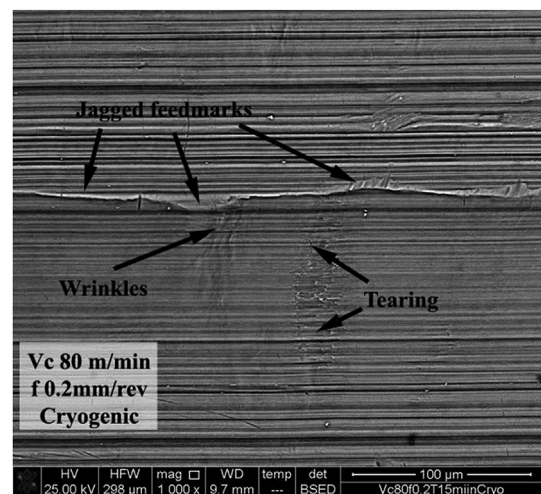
Main surface defects after 8 min of cryogenic cutting.
